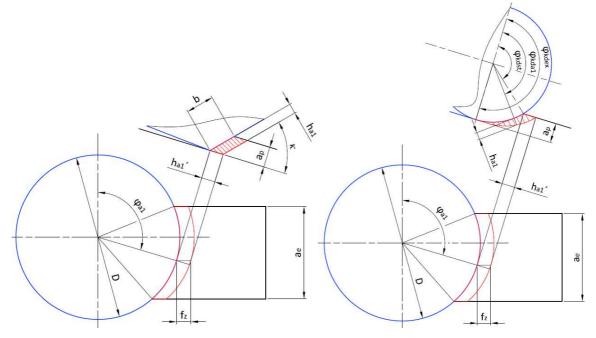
Face milling by milling head: a) square insert, b) round insert [18].
